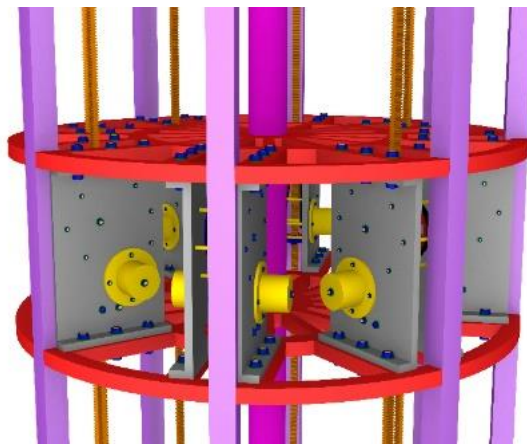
Internal view of WEC, equipped with the mechanical motion converter
